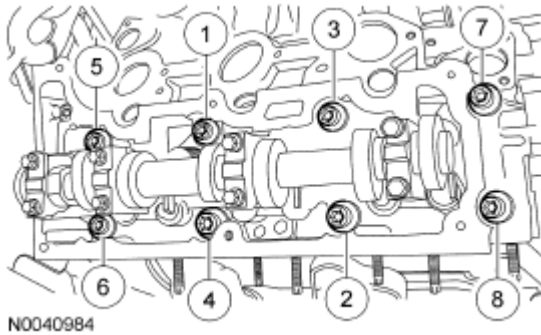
Identifying Tightening Sequence Of 12-MM Bolts
